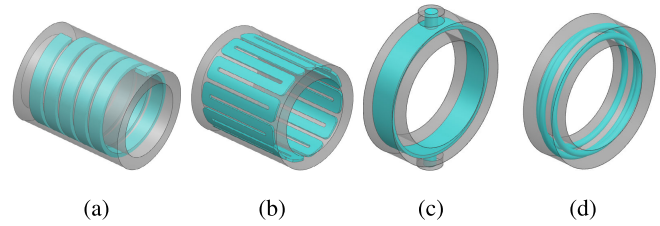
Examples of OD liquid cooling jackets for axial-flux PM machines: (a) spiral cooling jacket [91], (b) axial channels [111], (c) single radial channel [88], [89], [90], and (d) parallel channels [87], [98].
